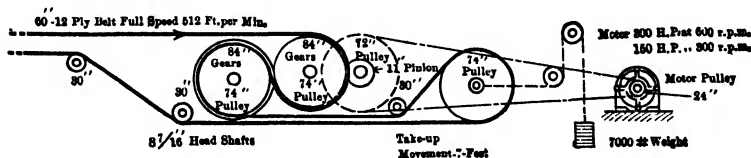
Tandem Drive for 60-inch 12-ply Belt. (Robins Conveying Belt Company.)
